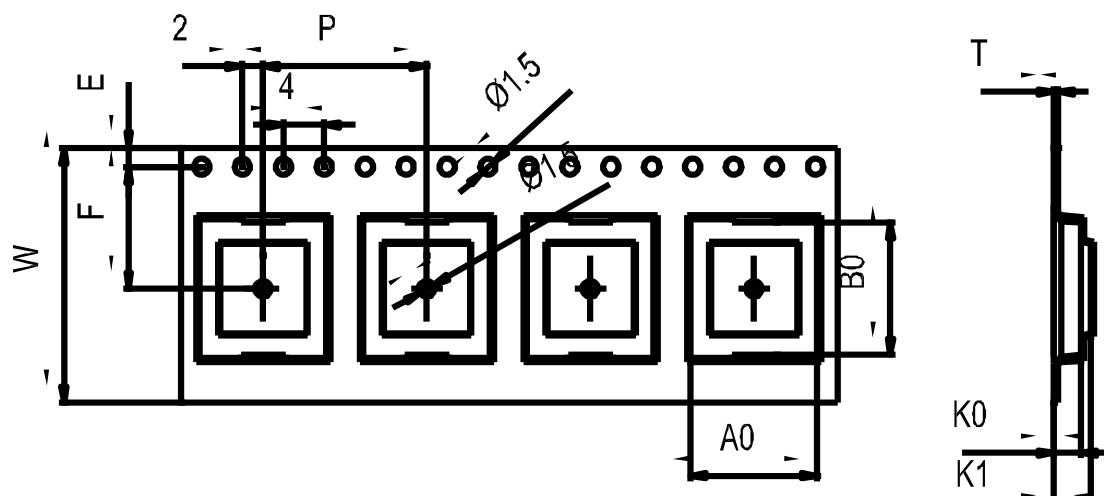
Carrier Tape Dimension Drawing (Unit: mm)
